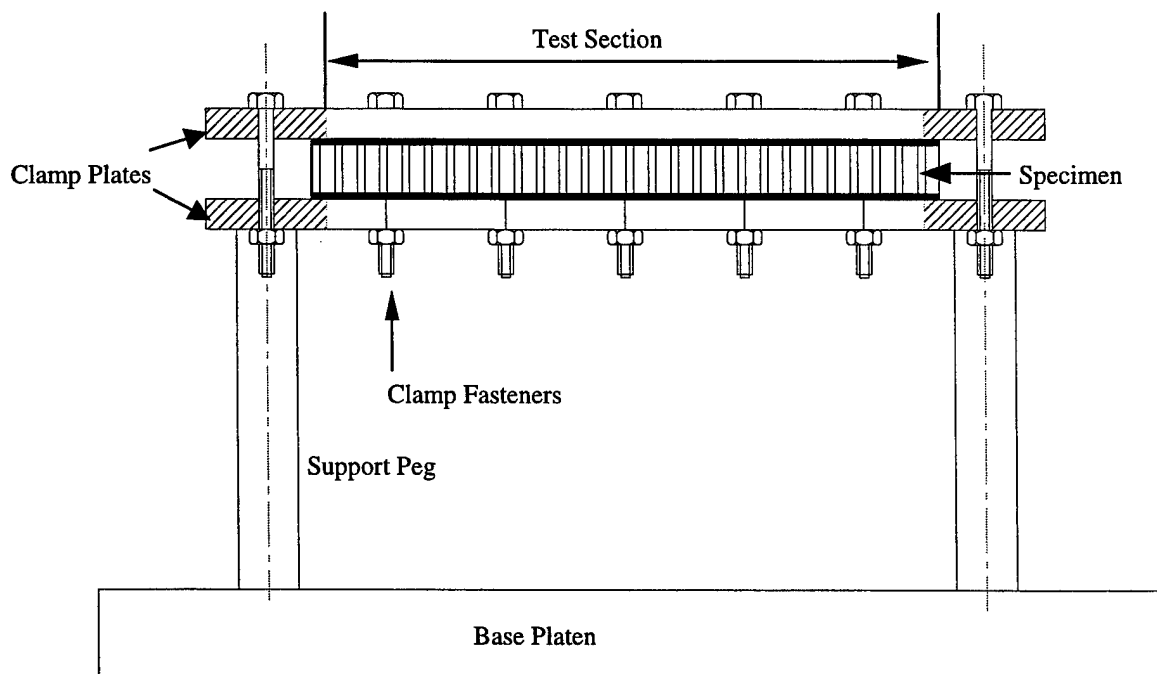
TYPICAL SPECIMEN MOUNTED ON FIXTURE TO SIMULATE CLAMPED END BOUNDARY CONDITIONS
